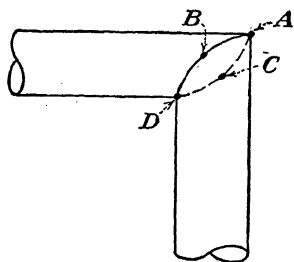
B.—Turn one tube half over and line as an angle weld. *A*, *B*, *C*, *D* are tack welds.
